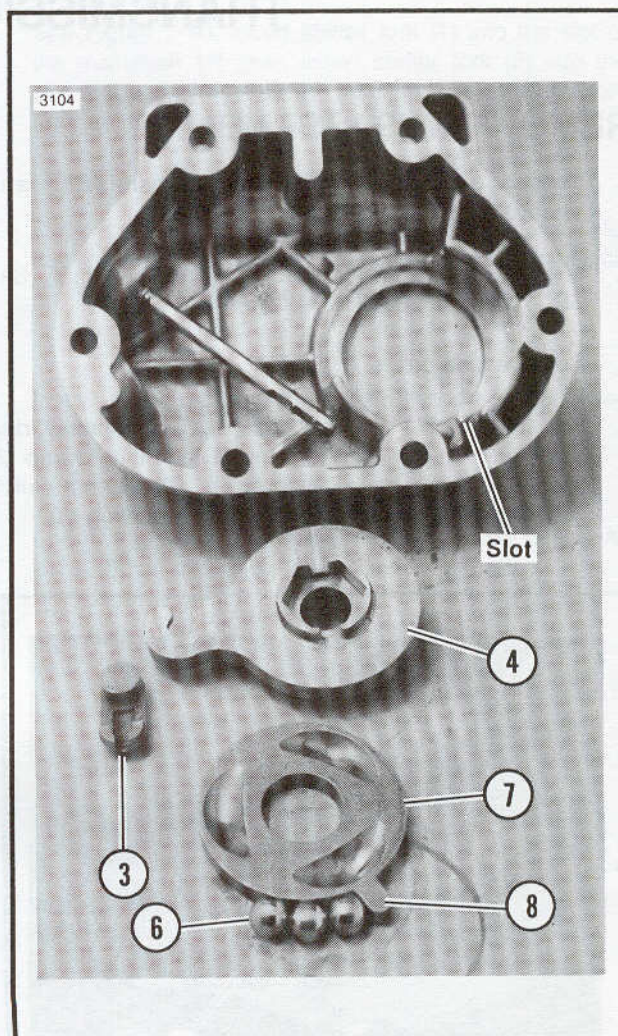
Ball and Ramp Mechanism Removed From Side Cover
